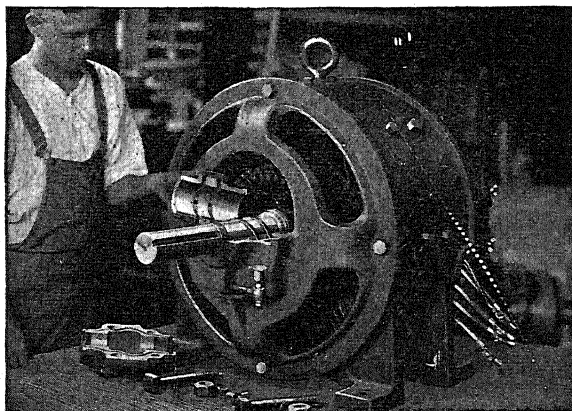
Reliance motor construction 11.* Split bearing with upper section removed.
